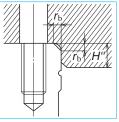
Shoulder for the Fig. 7 Shoulder for the ball slide datum surface
